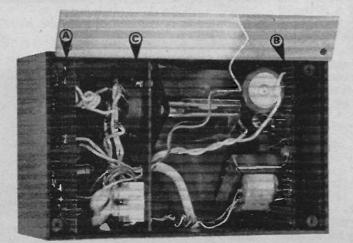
(above). The layout of the components on board B and details of wiring to the other boards.
